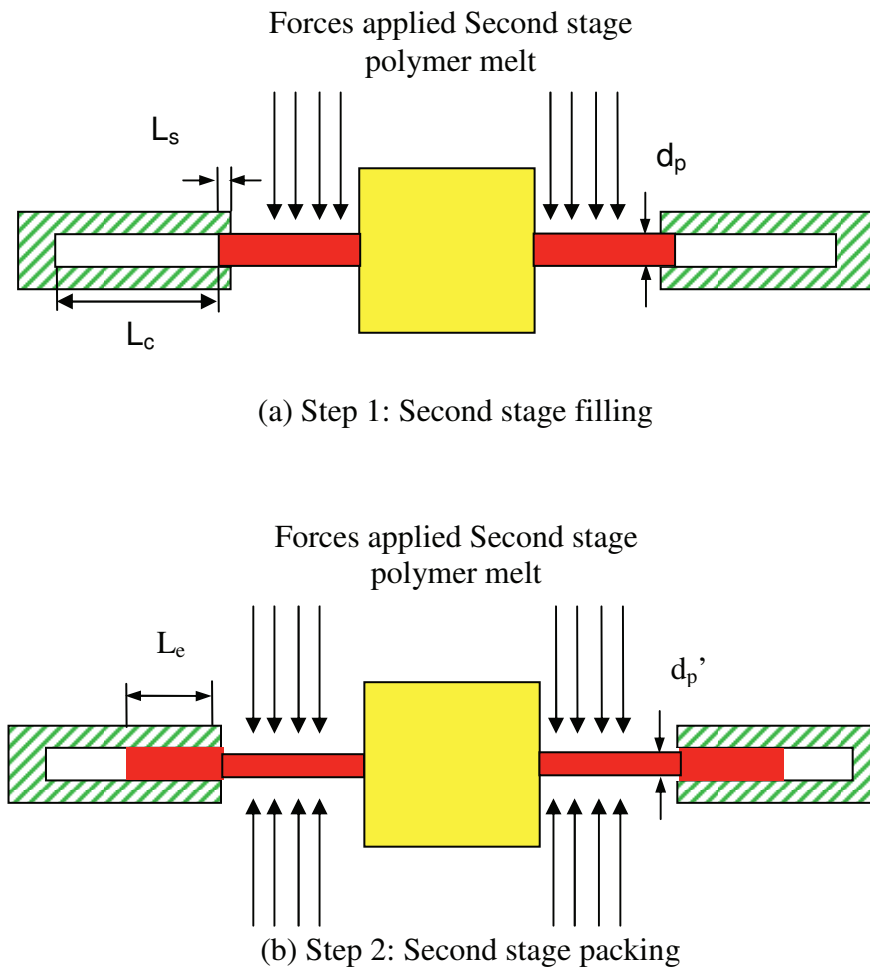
Mold design strategy for creating mesoscale in-mold assembled revolute joints
